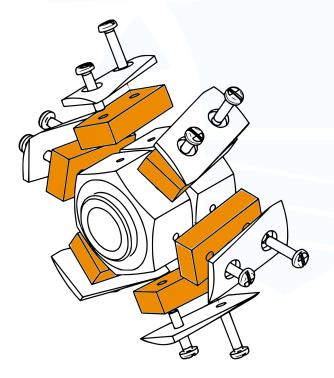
Align and weld the nuts on the thread shaft
